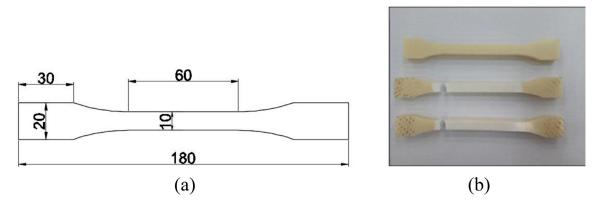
Specimens of base material in the tensile tests. (a). Geometry of dog-bone-shaped specimen. (mm) (b). Specimens before and after tests.
